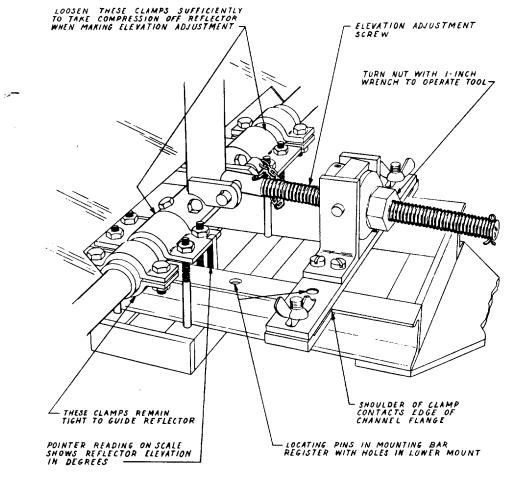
KS-16320, List 7 Elevation Adjustment Screw Assembly in Operating Position
